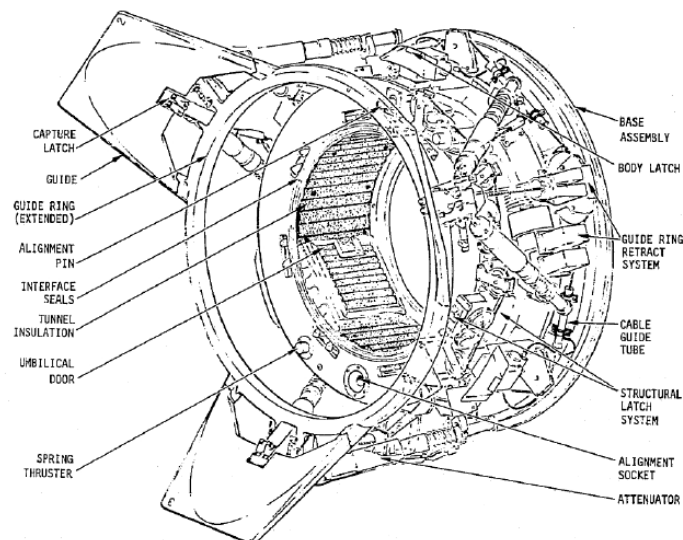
Technical drawing of the flight model of the American half [21]
